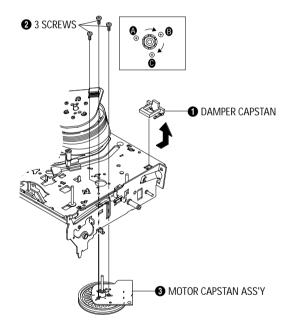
Damper Capstan, Motor Capstan Ass'y Removal
